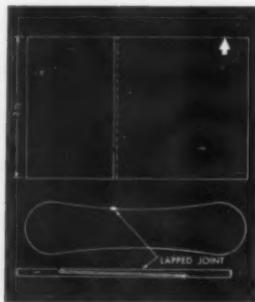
Lower drawing of lapped joint in ethyl cellulose belt, is exaggerated to illustrate detail.
